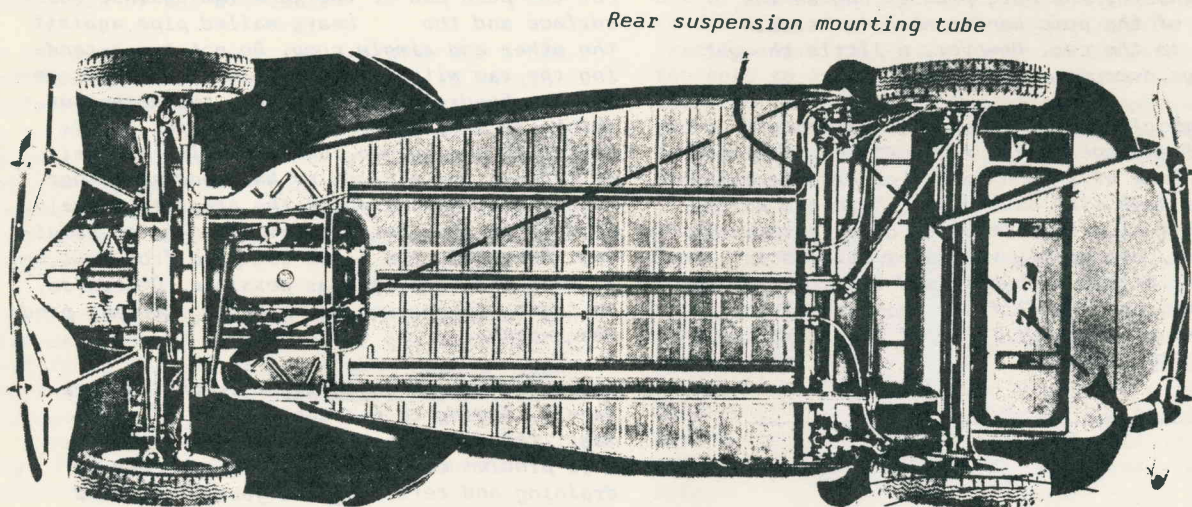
Underside of Traction body showing rear suspension mounting tube as thrust anchor.
